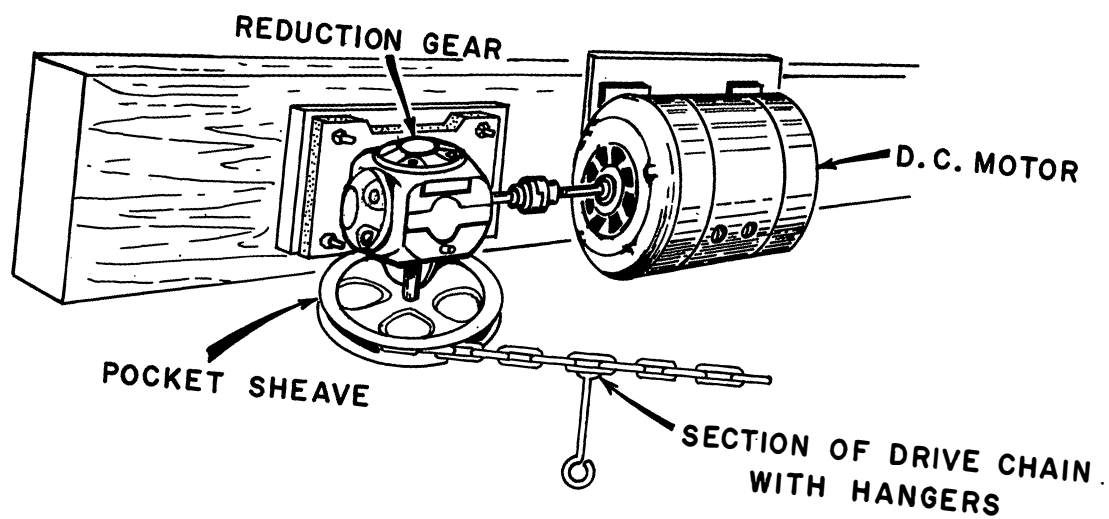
Sketch of variable-speed d.c. motor and reduction gear drive assembly.
